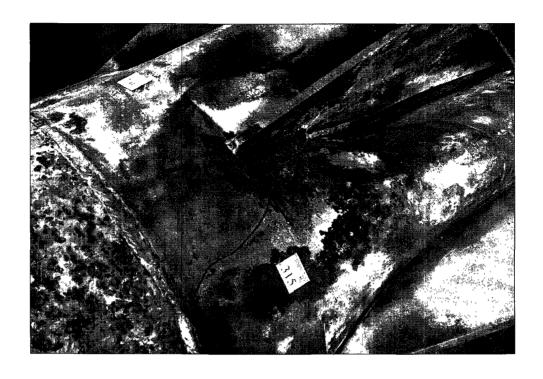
Overall views of outside diameter surfaces of burner tip.
